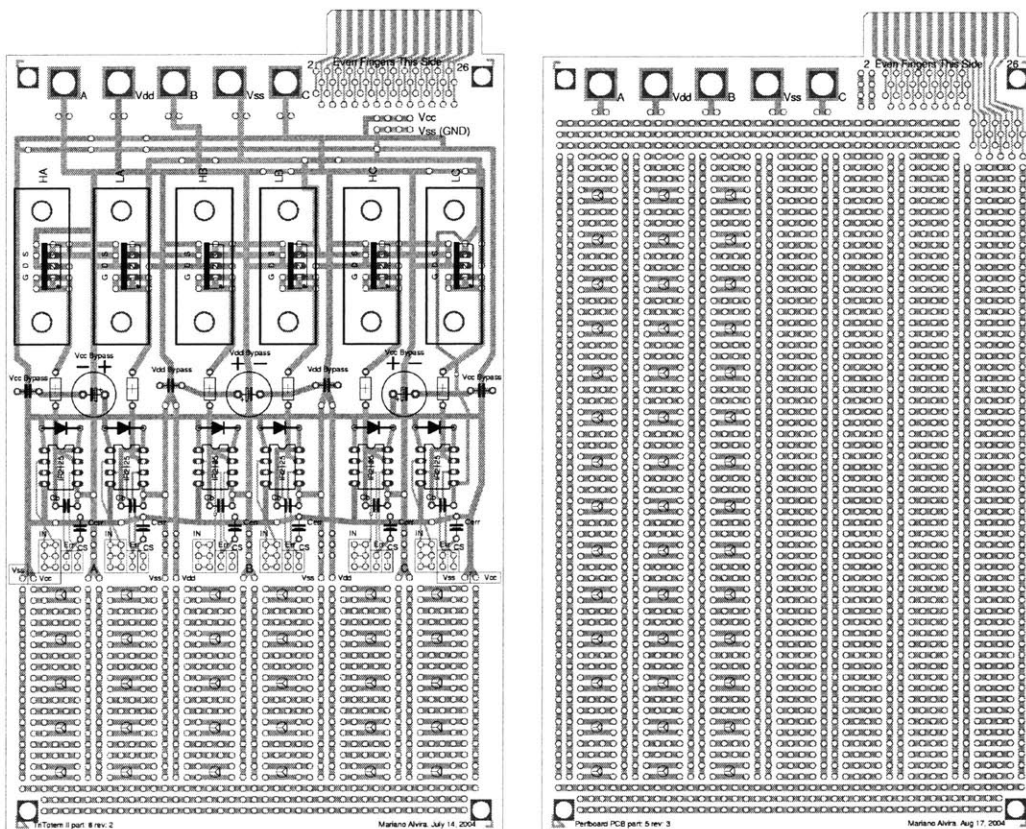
The laminated design sheet for the TriTotem II Card and the Solder Card.
